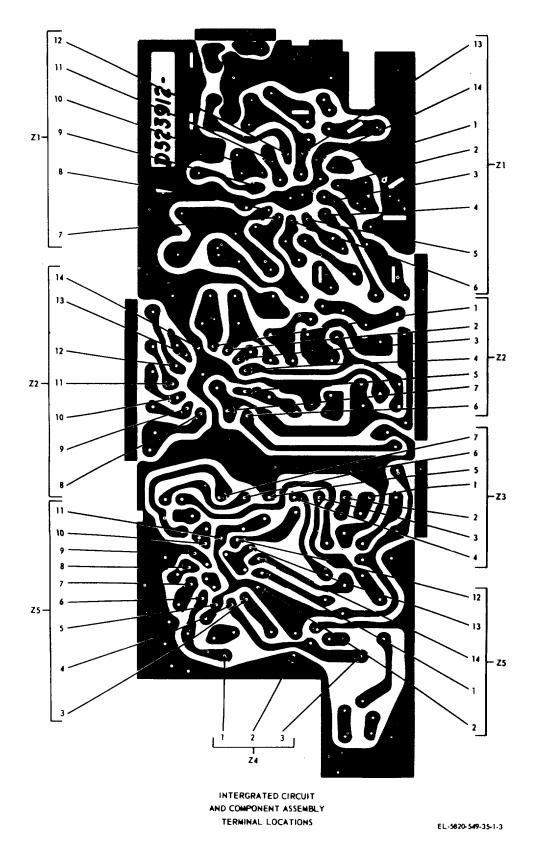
AN/PRR-9 (XE-9) printed circuit board, component terminal locations.
